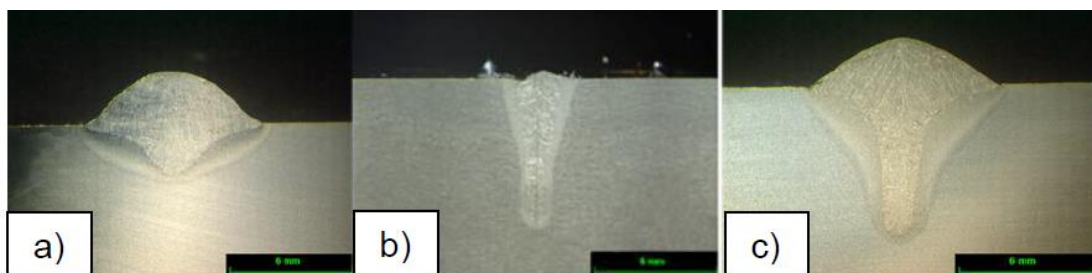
Weld bead profile in various welding processes (a) GMAW (b) Autogenous laser welding (c) Hybrid laser GMAW [16]
